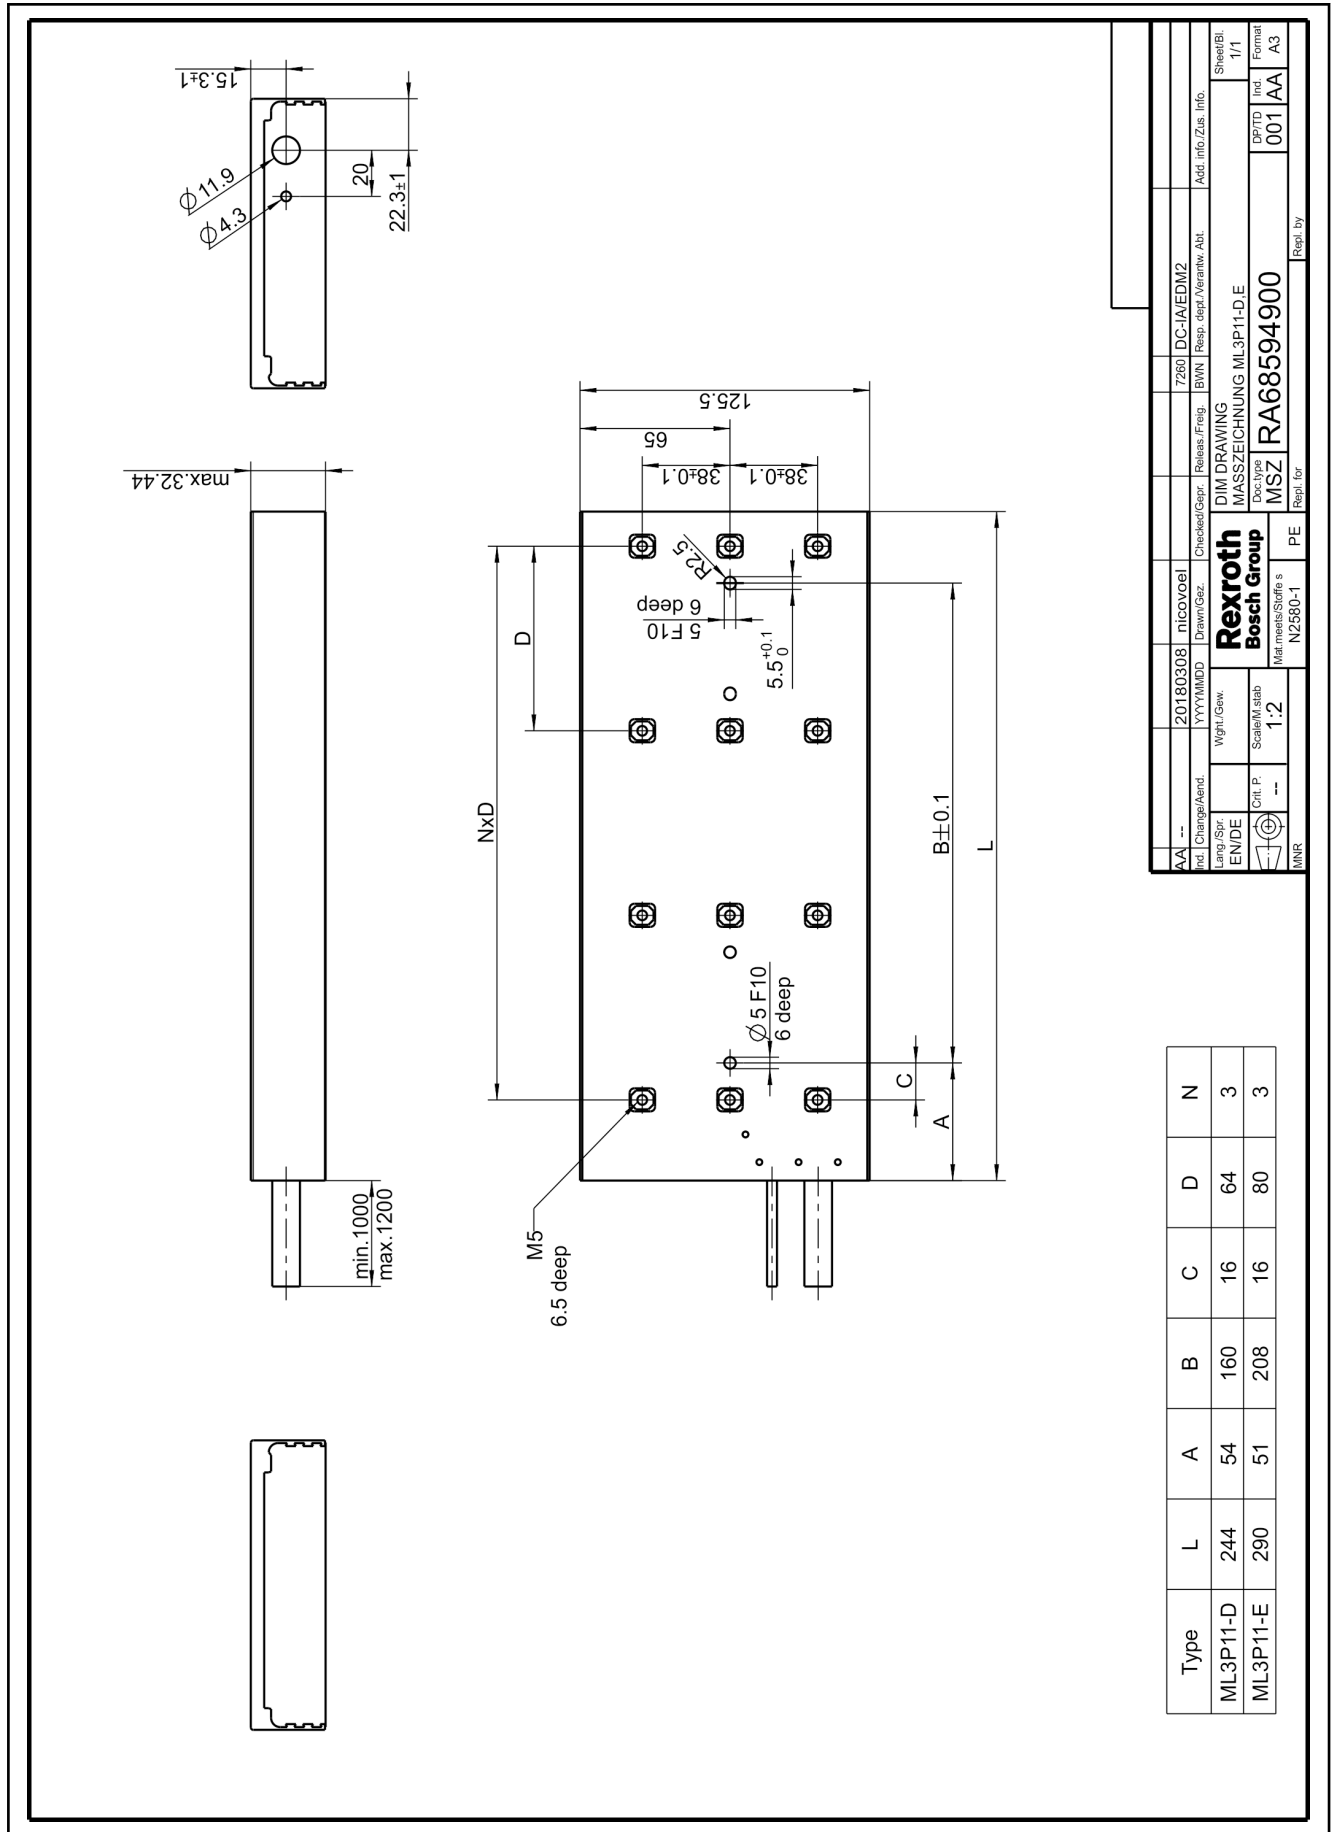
Dimension sheet primary part ML3P11 Frame lengths D, E
